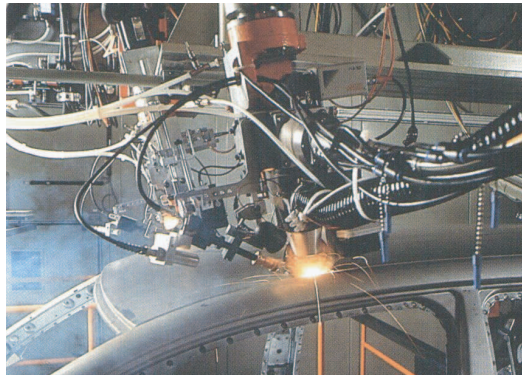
Laser welding of a VW Passat in Emden (2001), courtesy of VW.
